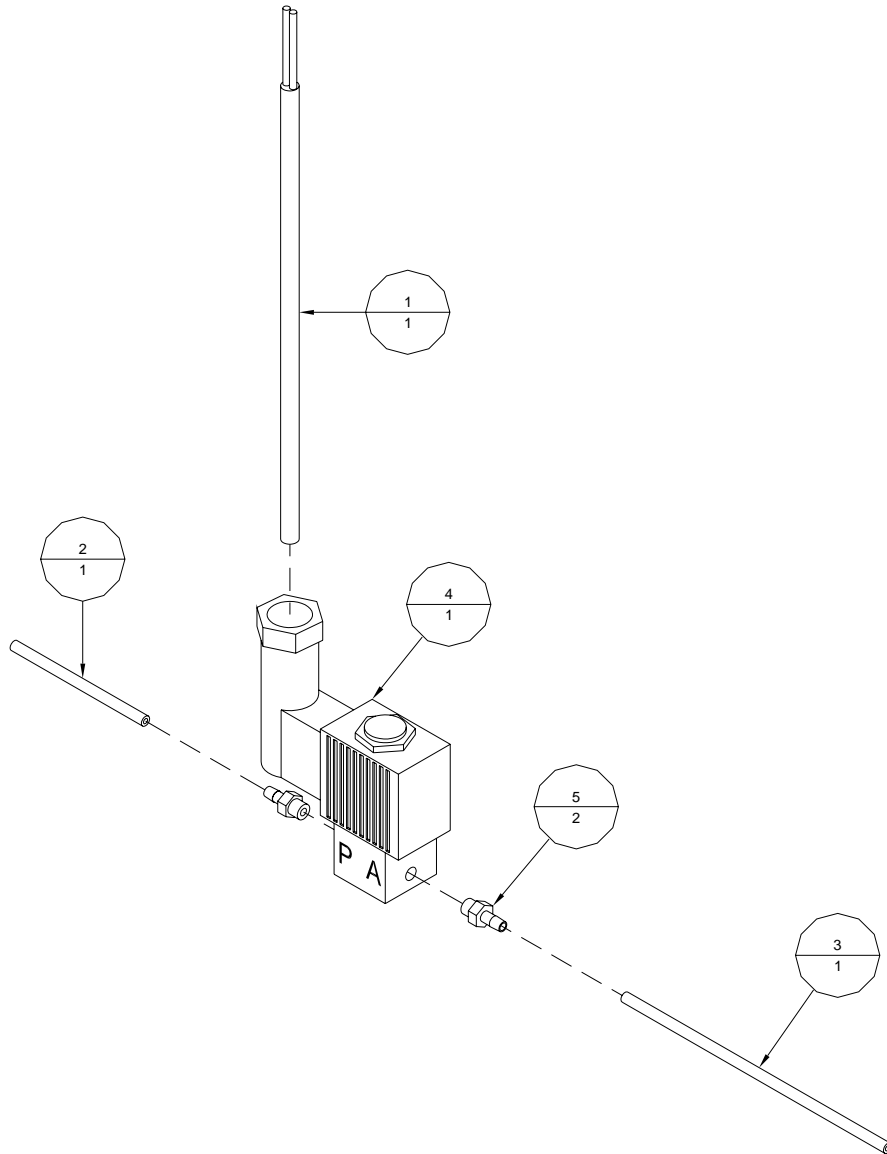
Solenoid Valve Assembly, Air (9101208A)
